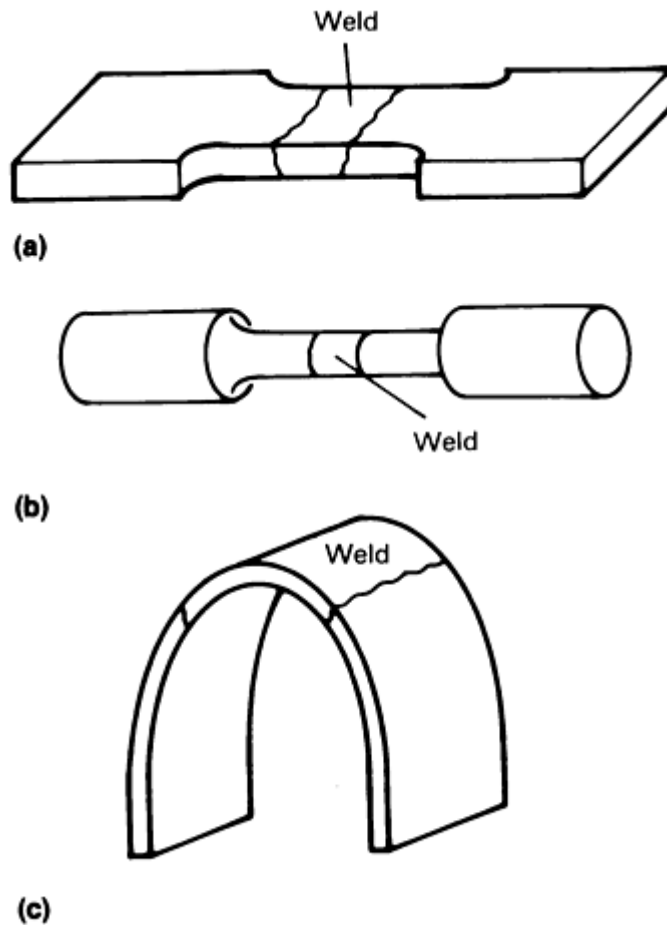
TENSION AND BEND SPECIMENS FOR TESTING OF FULL-PENETRATION GROOVE WELDS. (A) REDUCED-SECTION TENSION SPECIMEN. (B) ROUND TENSION SPECIMEN. (C) BEND SPECIMEN
